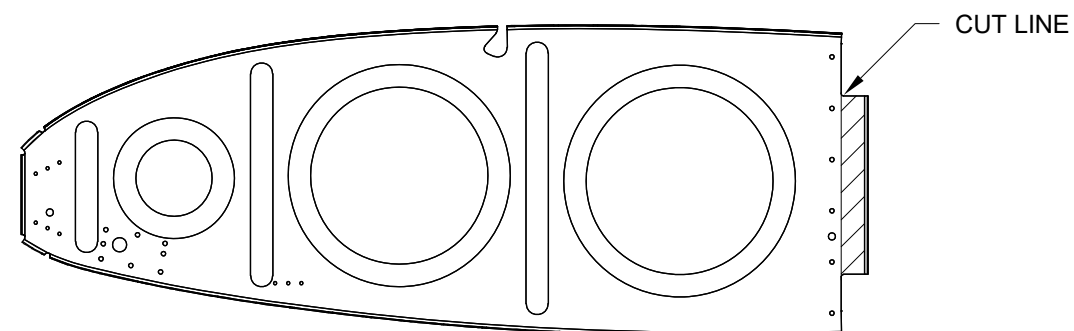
W-1208-1 NOSE RIB AFT FLANGE TRIM
